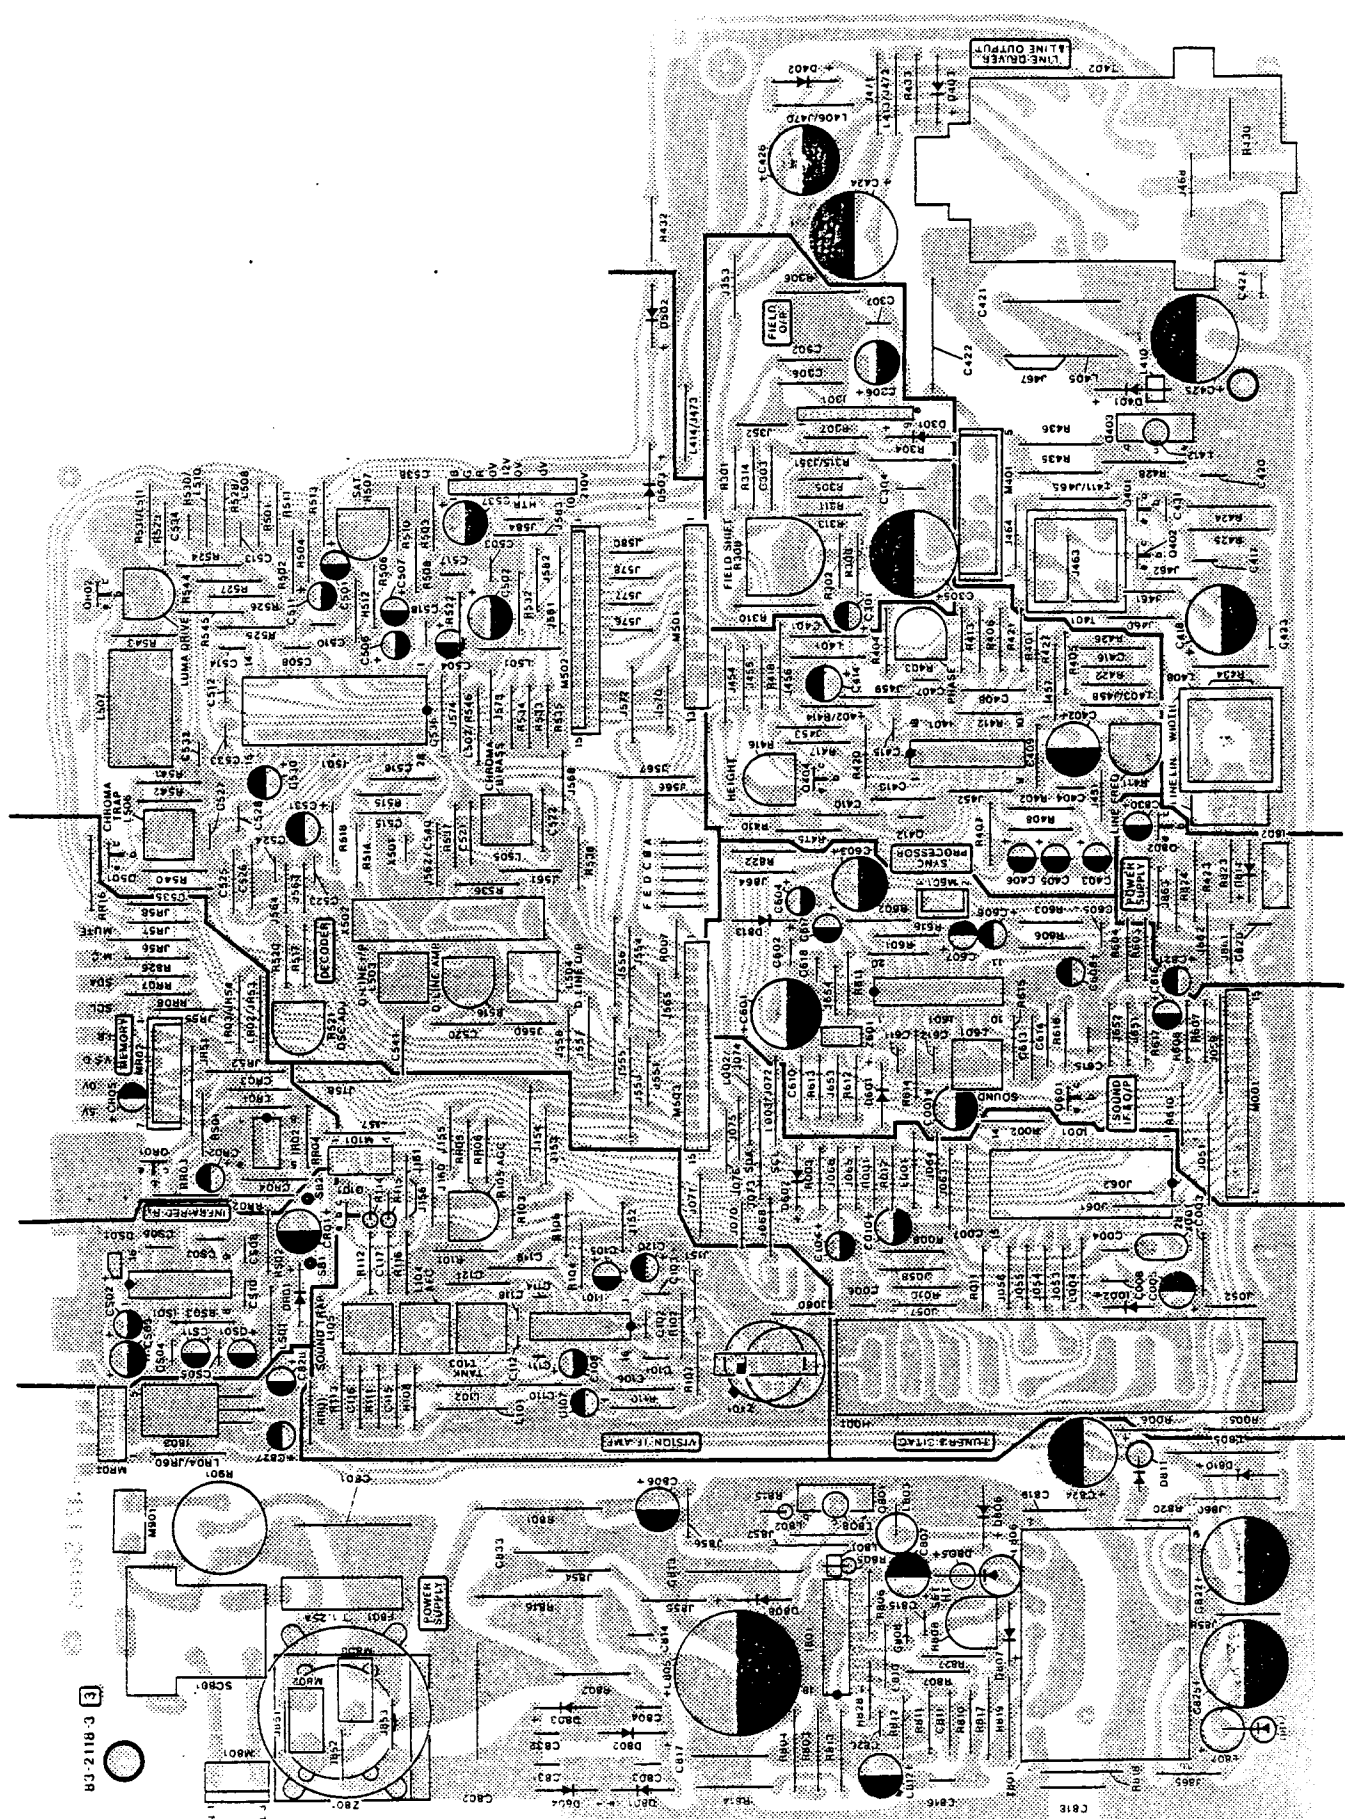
(a) 170 Series Main Chassis p.w.b. - component side
